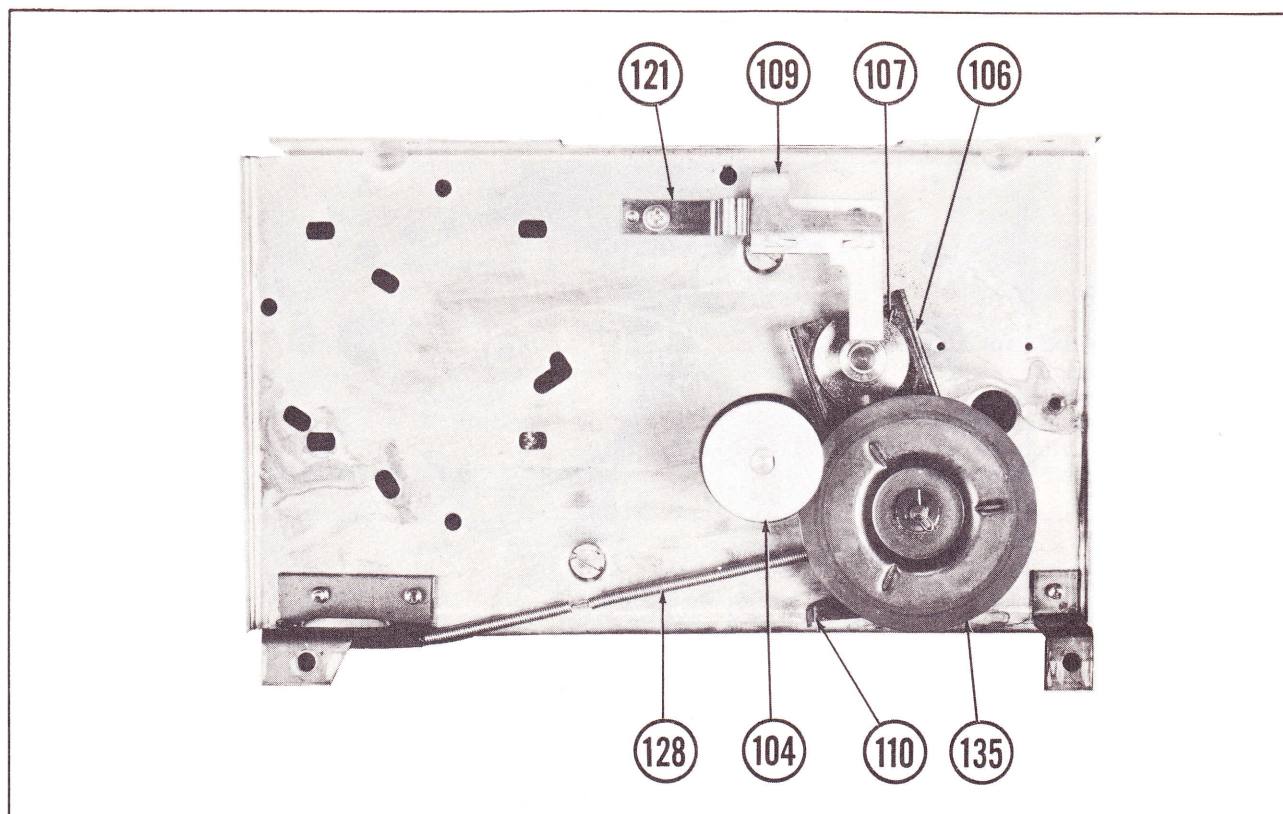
TOP VIEW OF DRIVE PLATE ASSEMBLY
